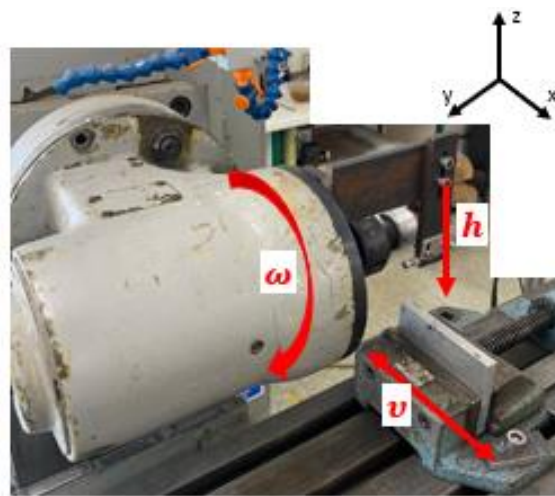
Milling machine head tilted along with the three process parameters.
